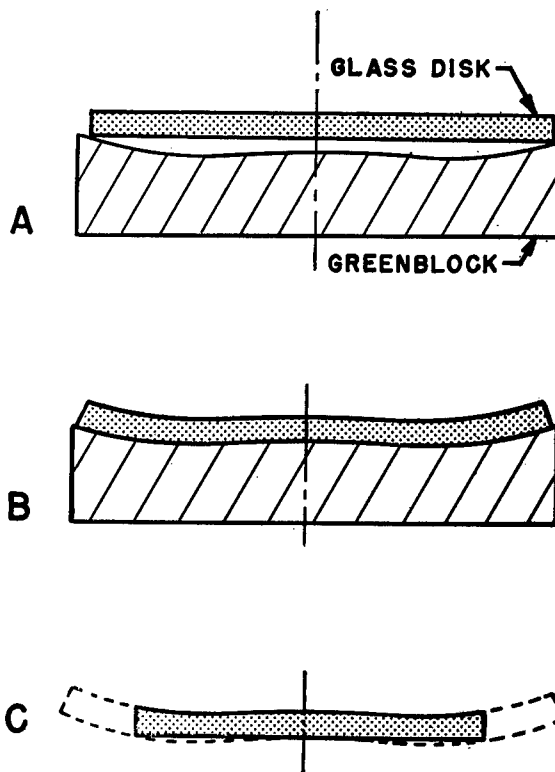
A. Sectional view of mold and blank before heating. B. Appearance after temperature cycle. C. Finished plate edged to diameter, lower surface ground and polished flat.
